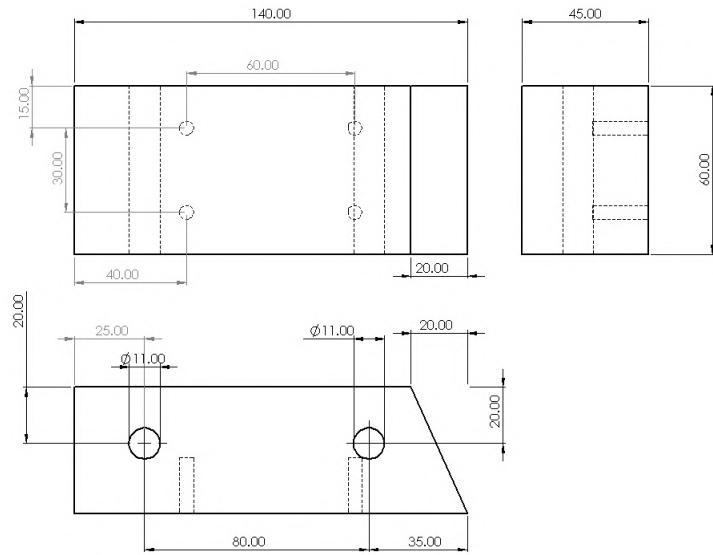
2D Drawing of the leg holder (All dimensions are in mm)
